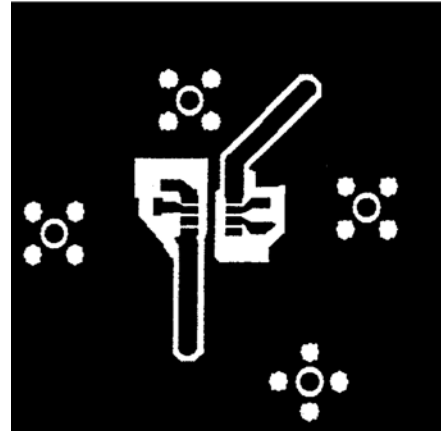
Noninverter SOIC Board Layout (Solder Side) (Looking Through the Board)
